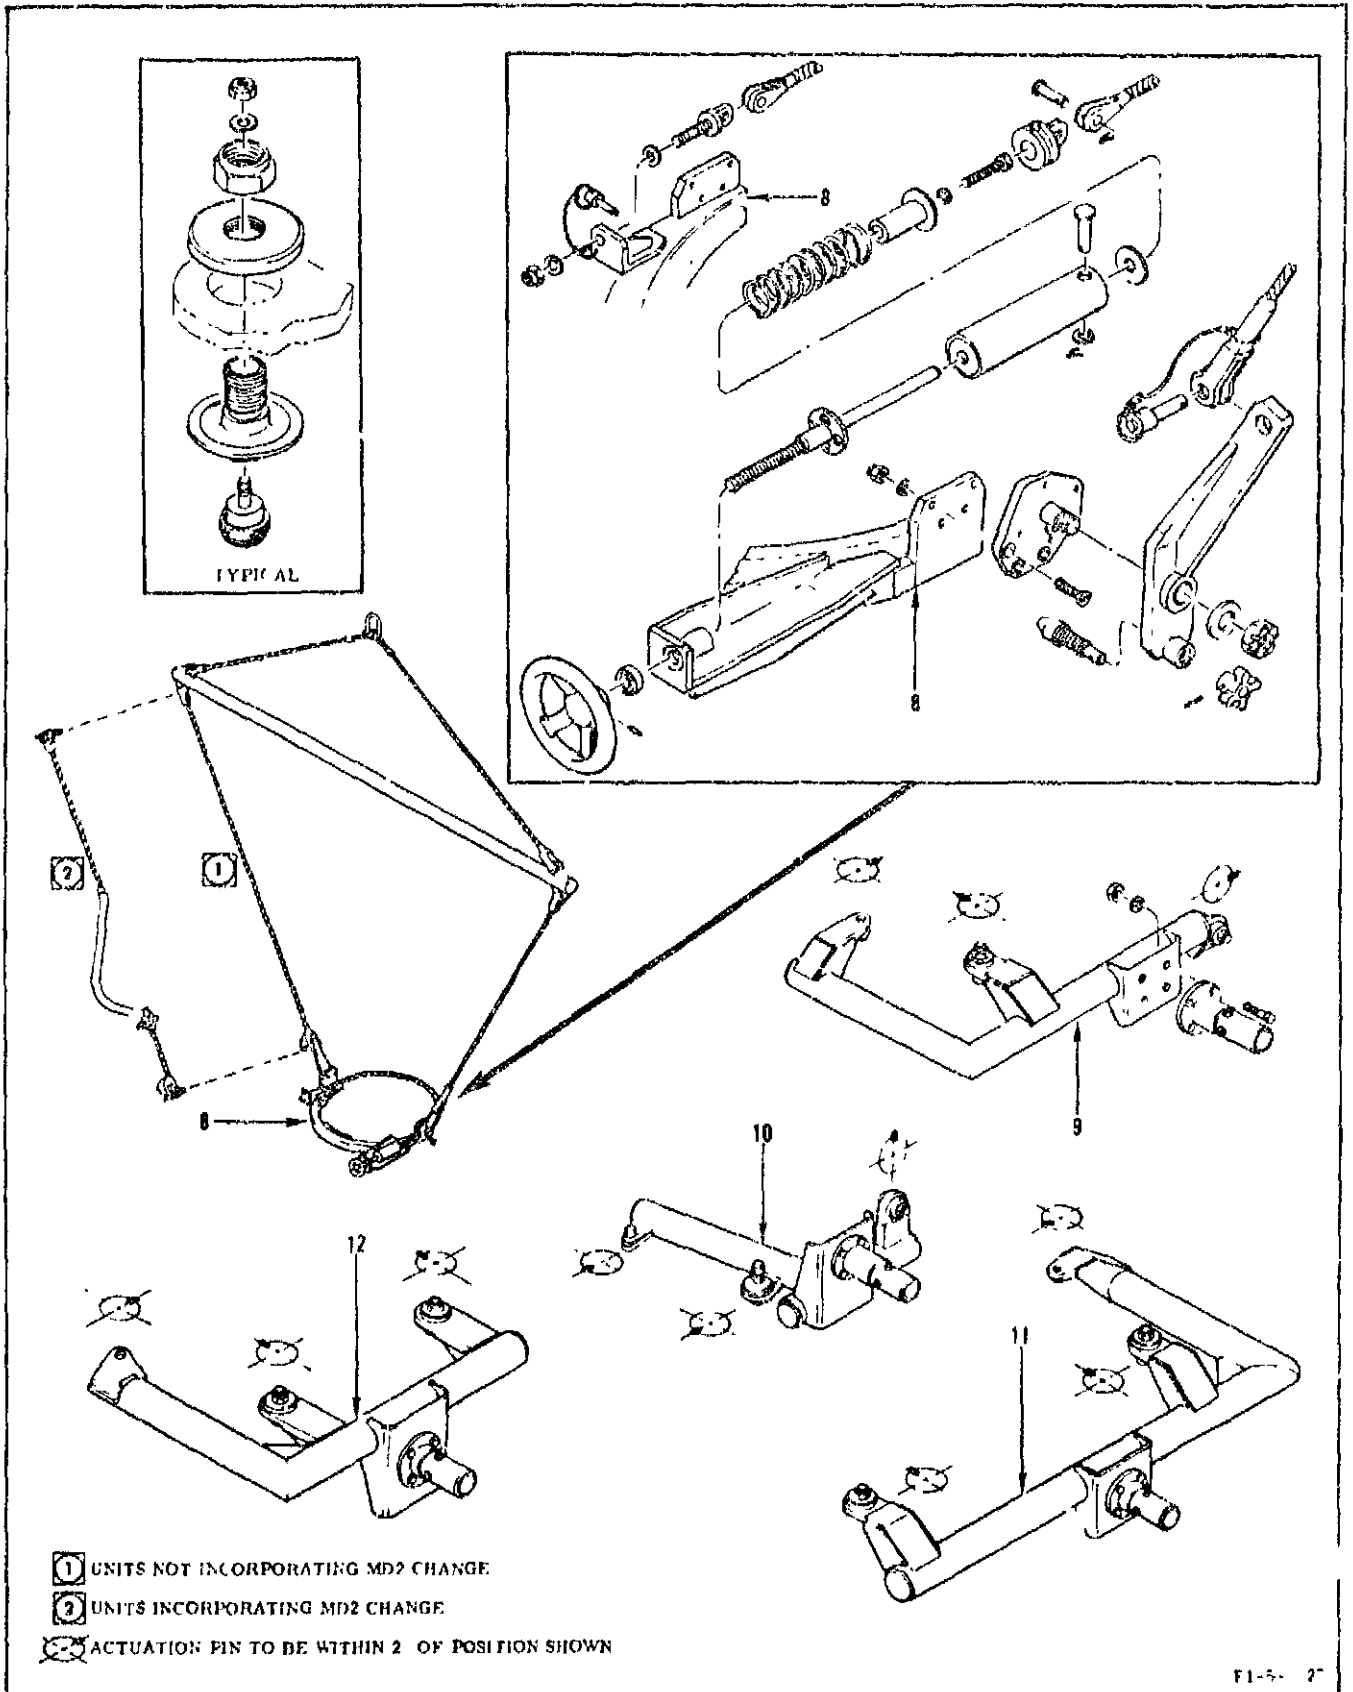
Component Handling Fixture Set (Sheet 2 of 7)
